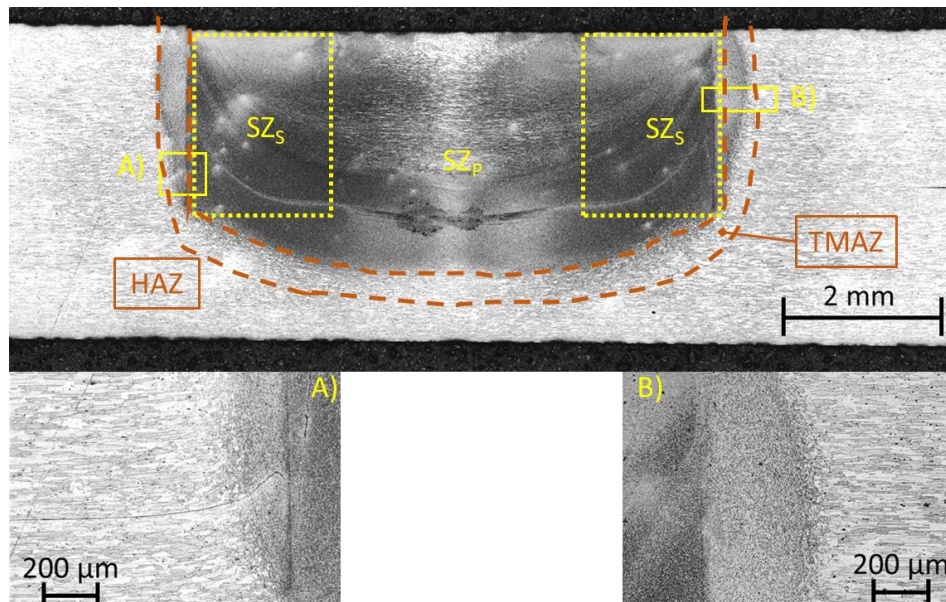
Cross-section of RFSSW AA7075-T6 welding condition W21 (RS = 1000 rev/min; PD = 2.4 mm) with sealant:
